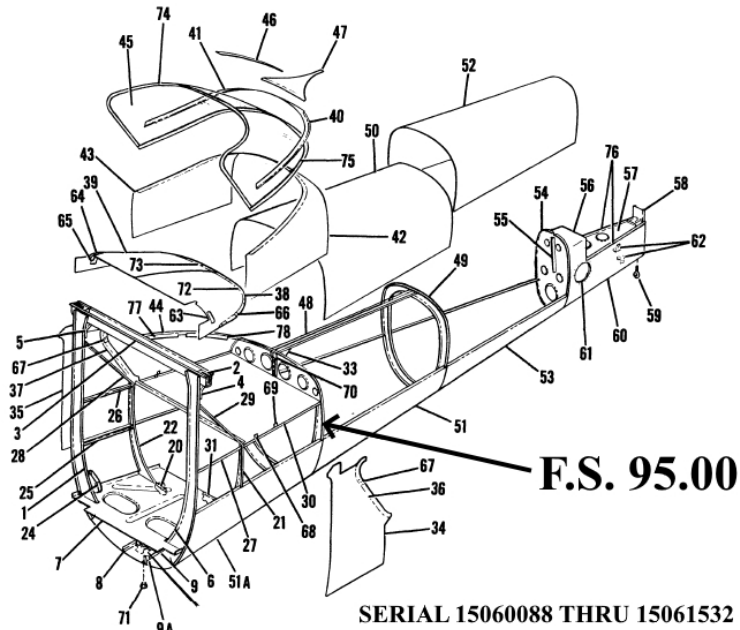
FUSELAGE TAILCONE ASSEMBLY
